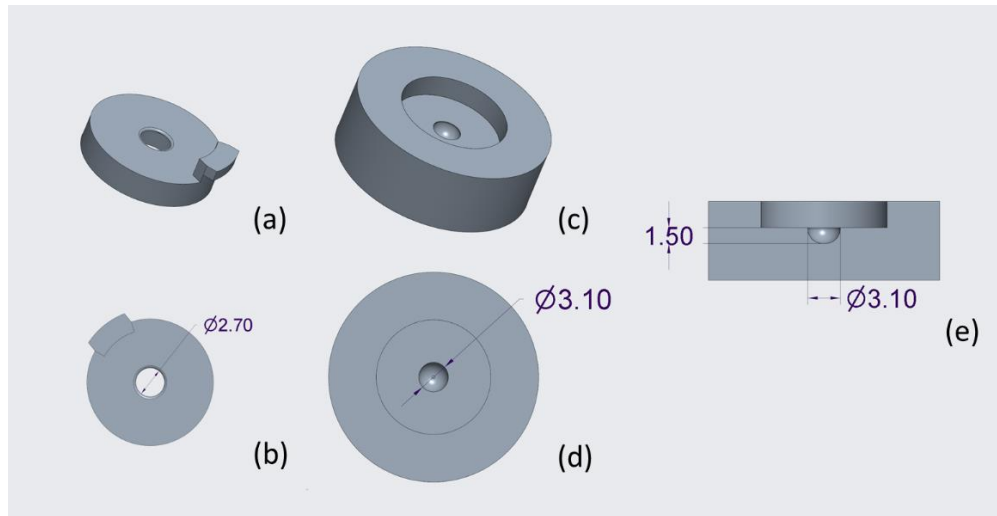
Design of the mouse retinal phantom. The dimensions stated were in mm. (a) and (b) show the designs and dimensions of the iris phantom. (c) and (d) show the design and dimensions of the anterior chamber. (e) shows a slice view of the anterior chamber design.
